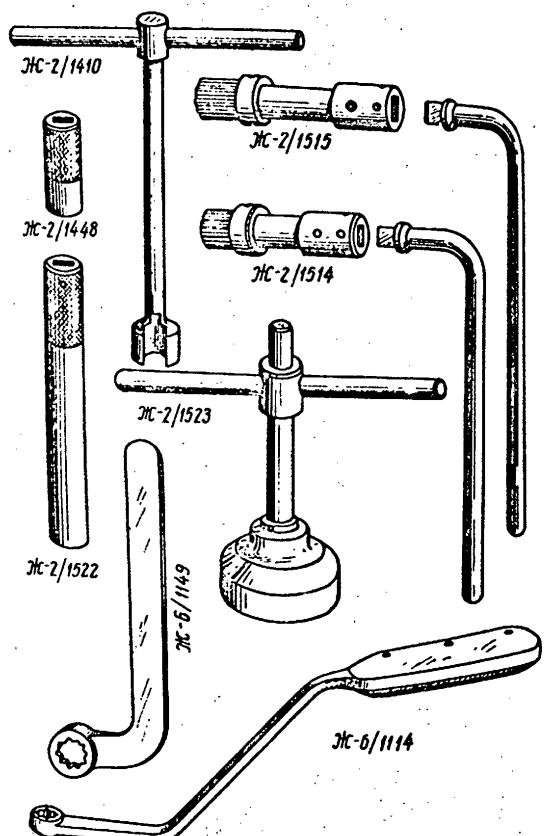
TOOLS FOR ASSEMBLY OF CRANKCASE NOSE-PIECE, ENGAGEMENT CLUTCH AND STRAIGHTENER
